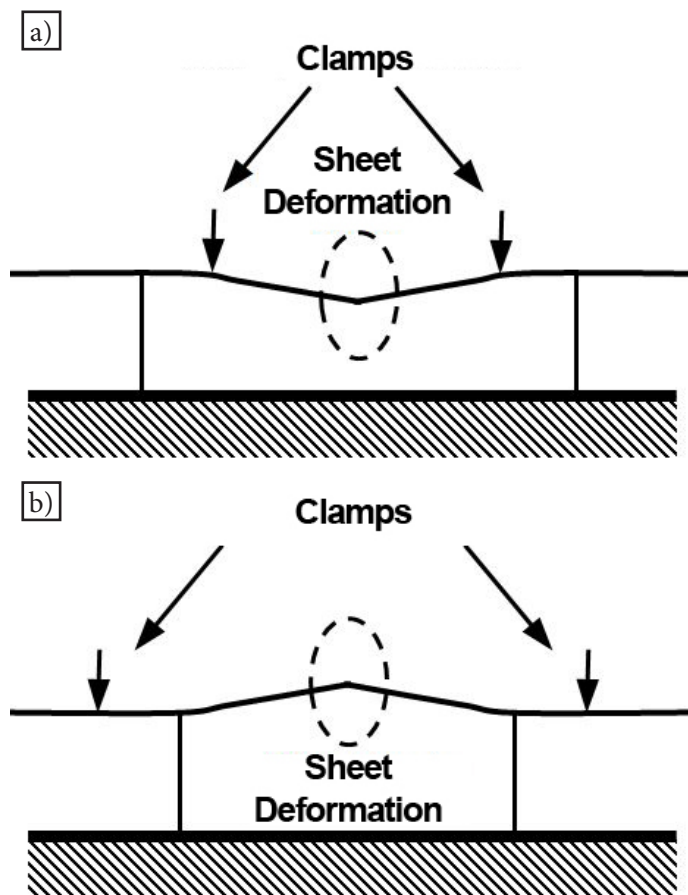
Possible deformation of elements at the interface triggered by the incorrect fixing of the elements to be welded, a) clamps of the equipment are overly close to the welding line welding, b) clamps of the equipment are excessively far from the welding line [3]
